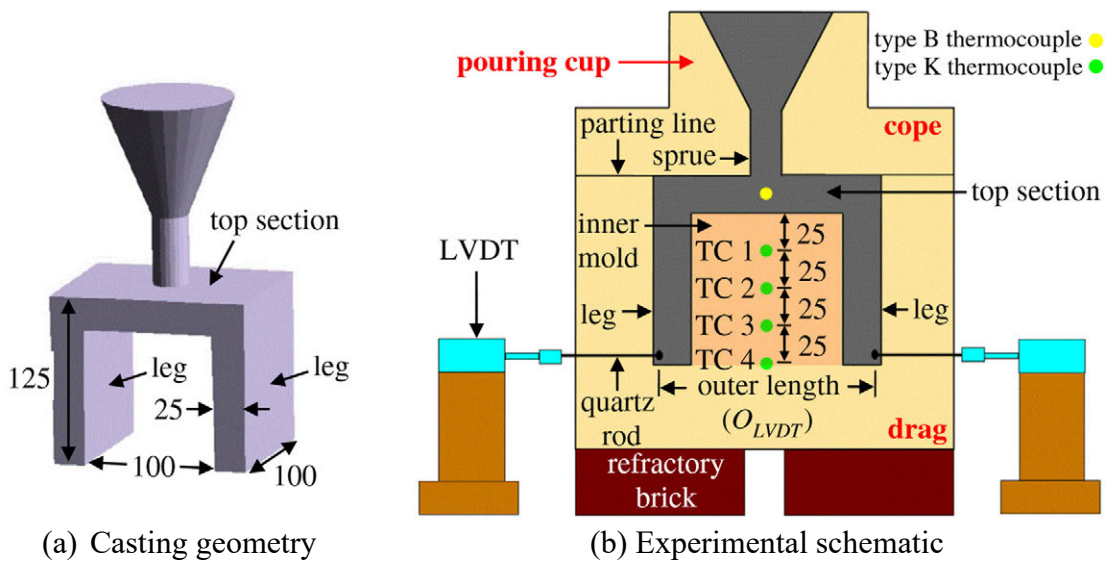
Casting geometry (a) and experimental schematic (b) for the bracket experiments. All dimensions are in mm.
